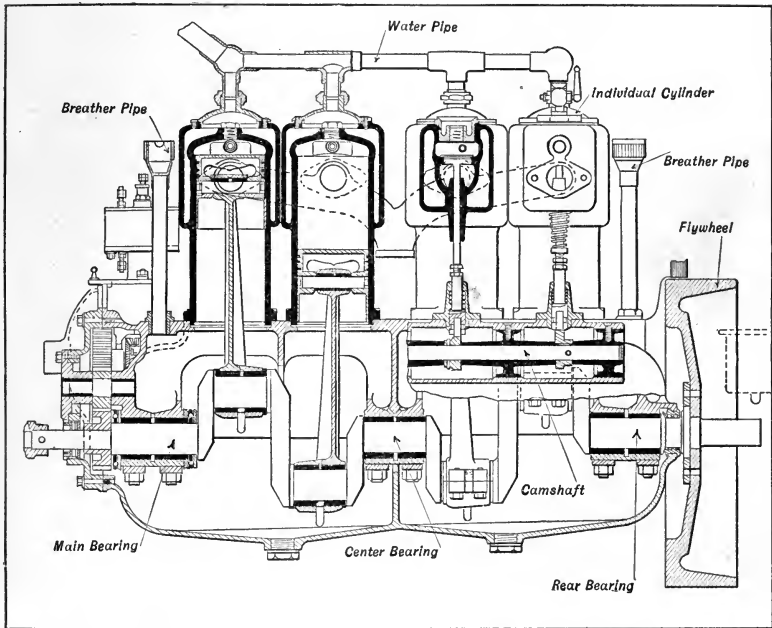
Sectional View of Typical Four-Cylinder Motor Using Individual Cylinder Castings with Cylinder Heads Cast Integral. General Design Fair, Excepting that of Connecting Rods.
